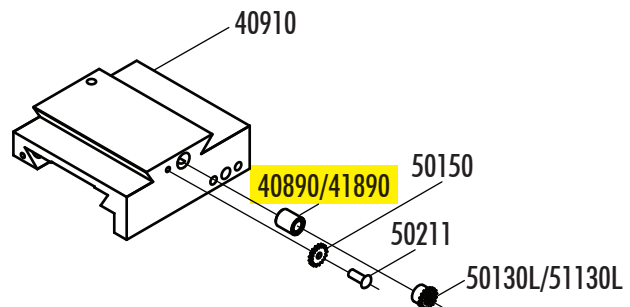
Lathe saddle. The slide screw insert nut is highlighted in yellow. Additional listed parts: Lathe Backlash Nut (P/N 50130L/51130L), Anti-Backlash Lock (P/N 50150), 8-32 X 1/4" Button Socket Screw (P/N 50211), Lathe Saddle (P/N 40910).
